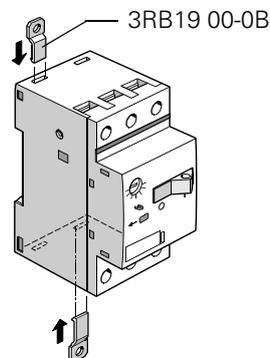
Screw-on mounting of the 3RV1 (example: frame size S00)
